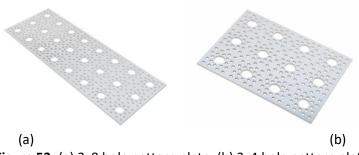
(a) 3x8 hole pattern plate. (b) 3x4 hole pattern plate
